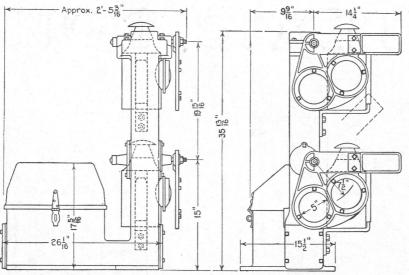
Dimensions of Two Arm Model 2 Solenoid Dwarf Signal Spectacle R. S. A. drawing 1233, October, 1912.
